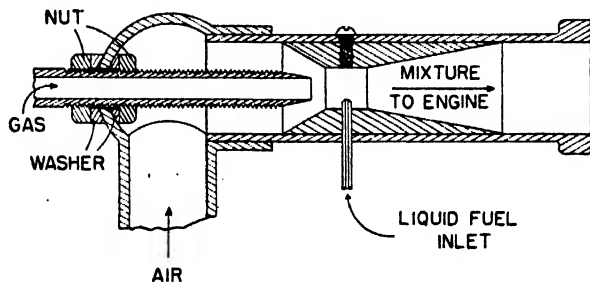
Carburetor arrangement used for running the C.F.R. engine on town gas.
